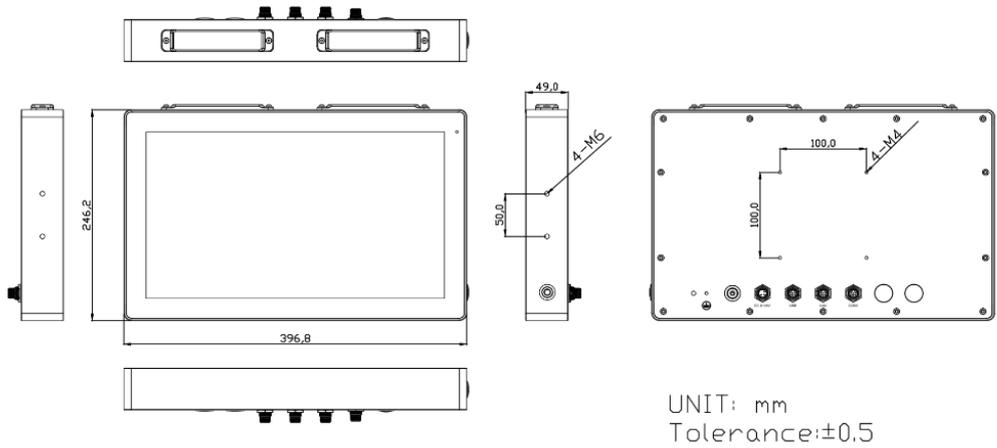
2 Dimensions of NuTAM-916EP(H)
